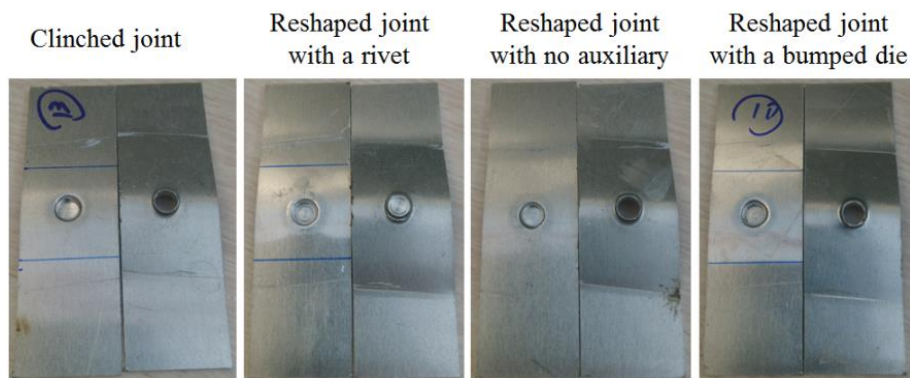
Neck fracture mode in the cross-tensile tests
